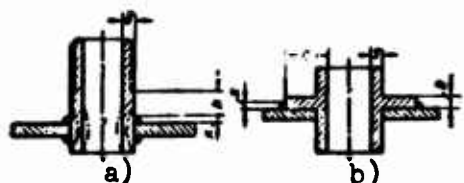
Variants of welding of bushings and stub pipes.
